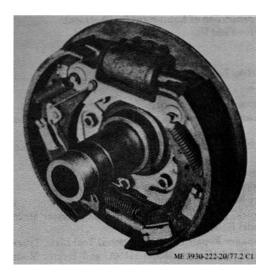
Wheel removed to show service brakes (Army model MHE 223).
